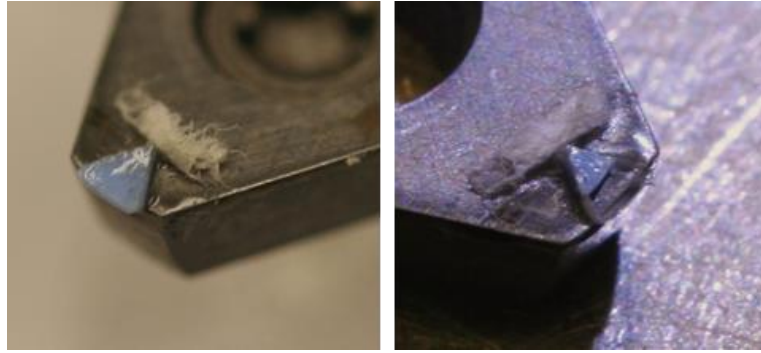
Grit Before Fracture (left), Grit After Fracture (right)
